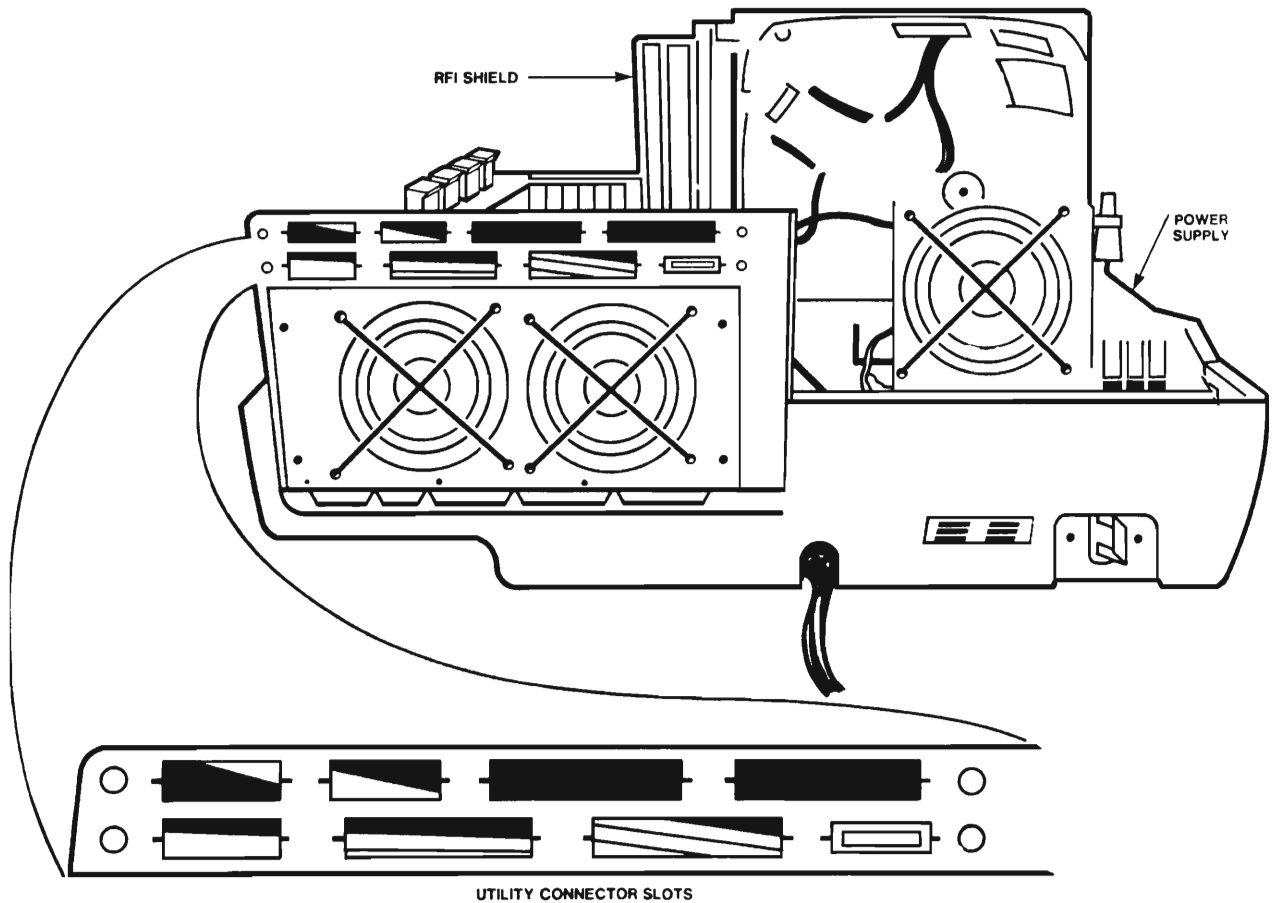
Series IV Mainframe with Cover Removed (Rear View)
